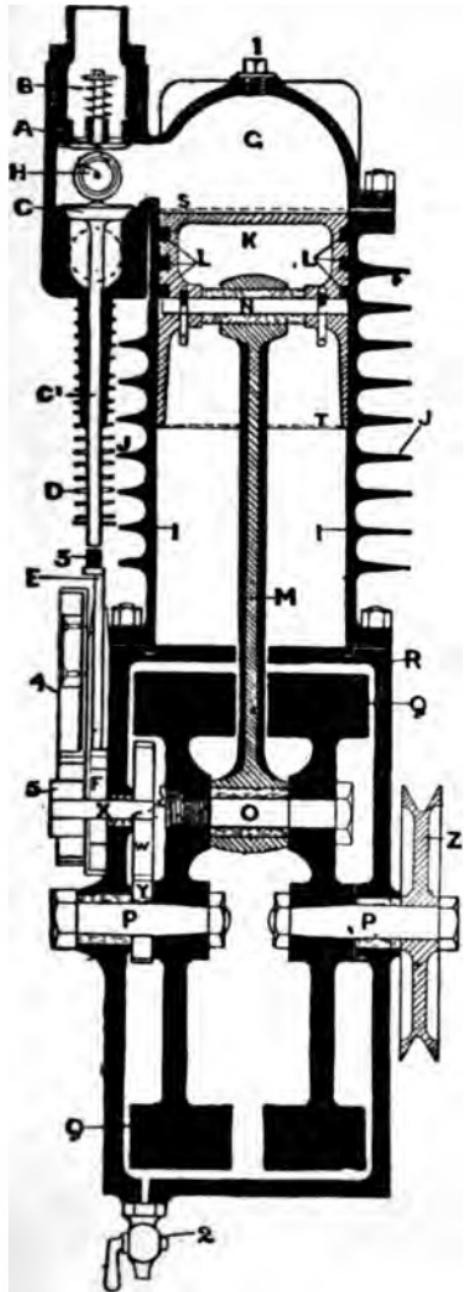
SECTION OF SINGLE CYLINDER ENGINE.
